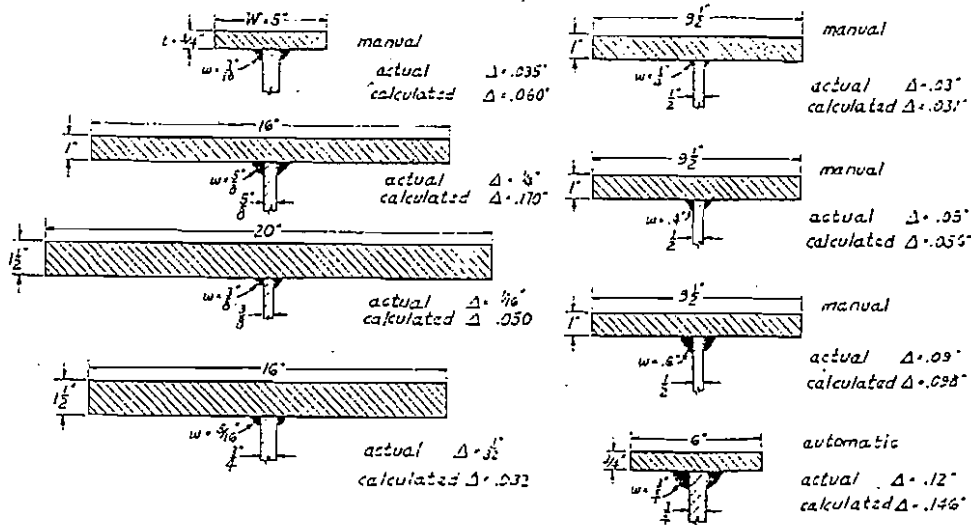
Warpage varies directly with flange width and weld size, and inversely with plate thickness.
